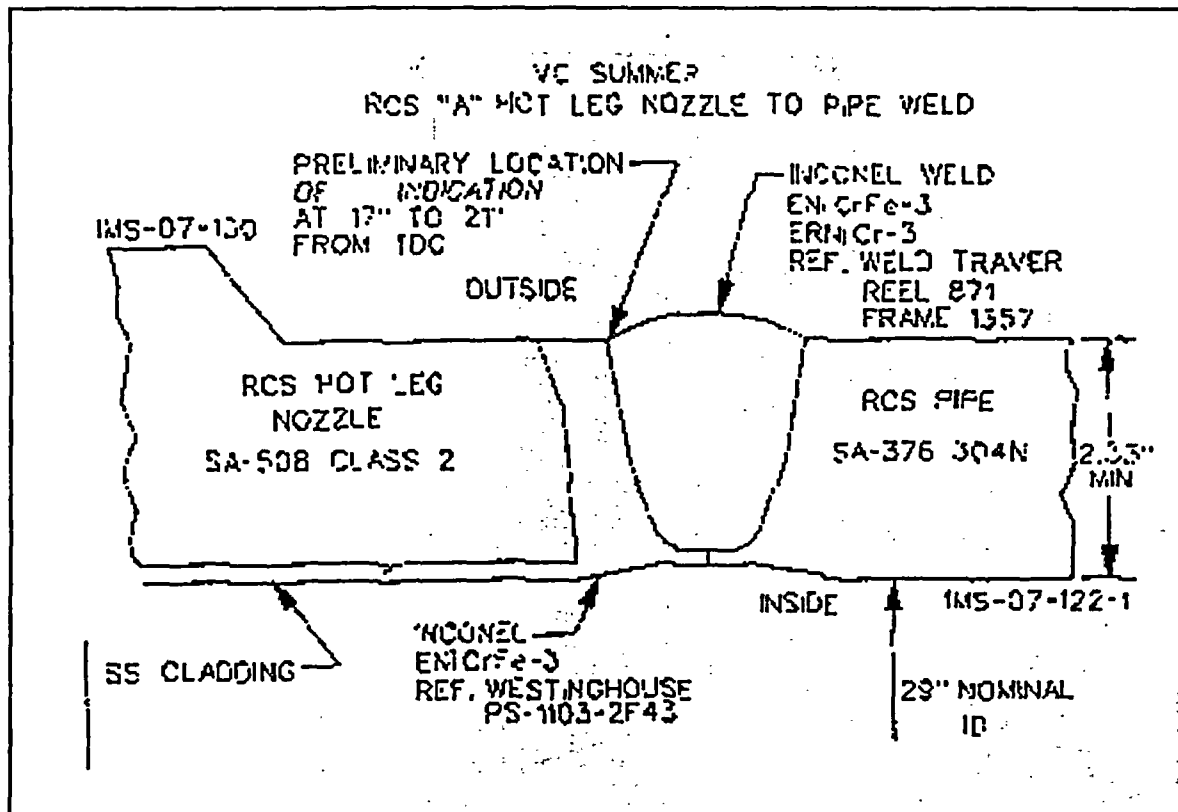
Geometry of VC Summer hot leg/RPV nozzle bimetallic weld joint
